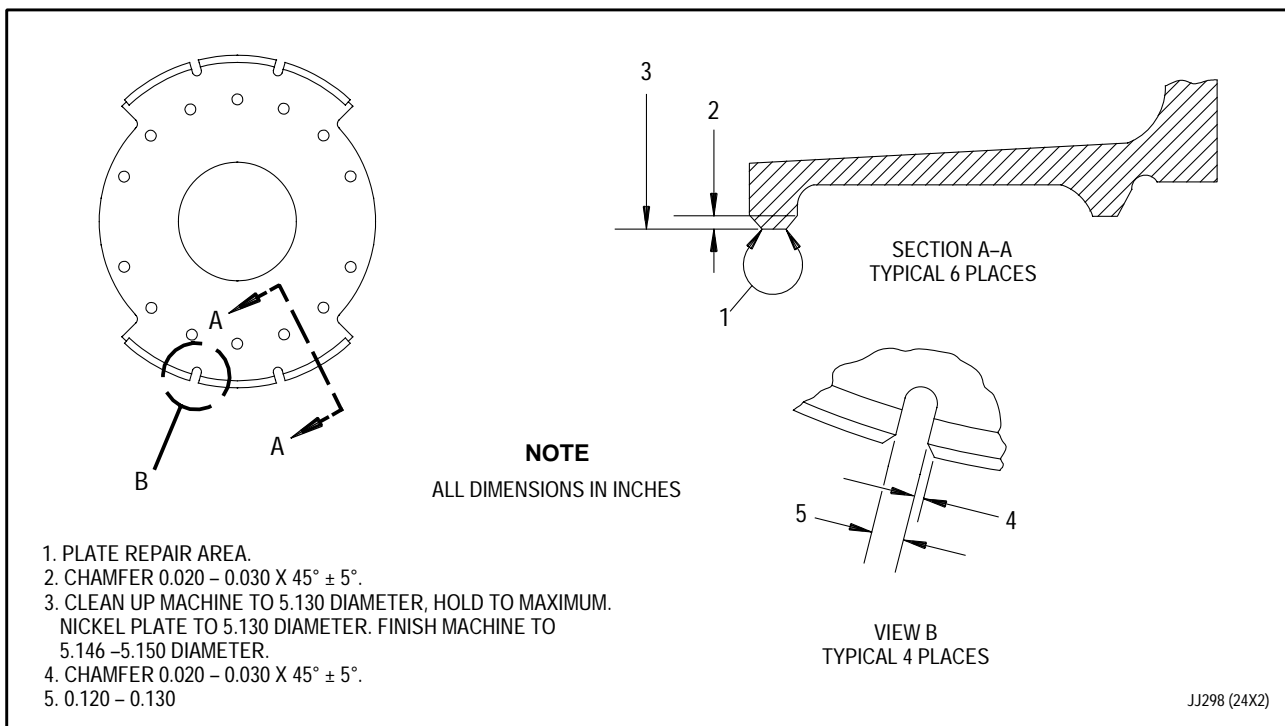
Front Compressor Drive Turbine Shaft Stiffeners - Snap Diameter Repair
